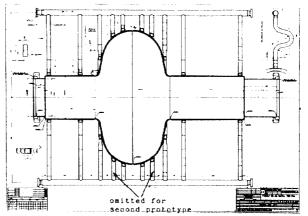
Basic layout of a single cell cavity with 6 cooling pipes attached to the cell. The second prototype cavity was built with only 4 pipes on the cell, the marked pipes where omitted.
